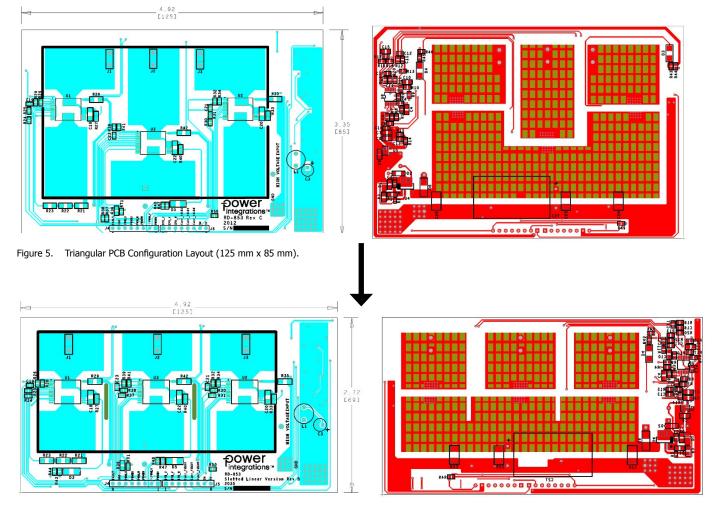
Slotted Linear PCB Configuration Layout (125 mm x 69 mm).
